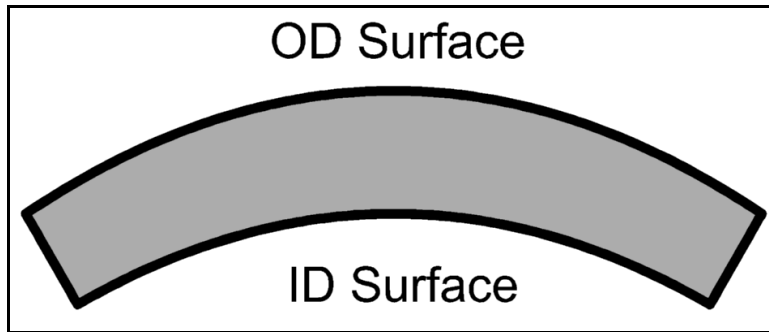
Schematic of Weld Coupon Cross-Section
